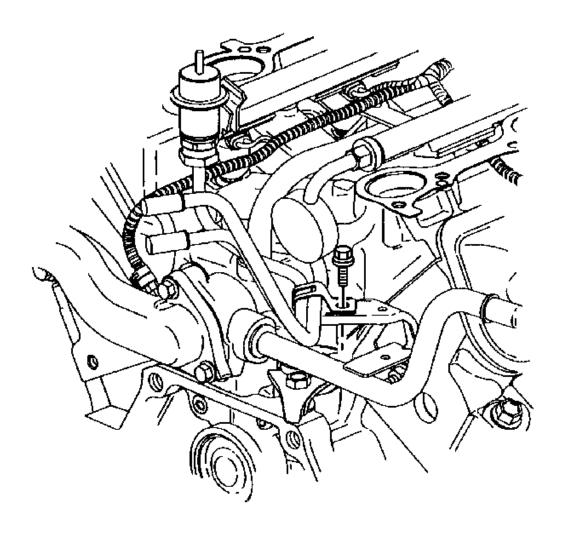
Installing Fuel Pipe Clip Bolt Courtesy of GENERAL MOTORS CORP.
